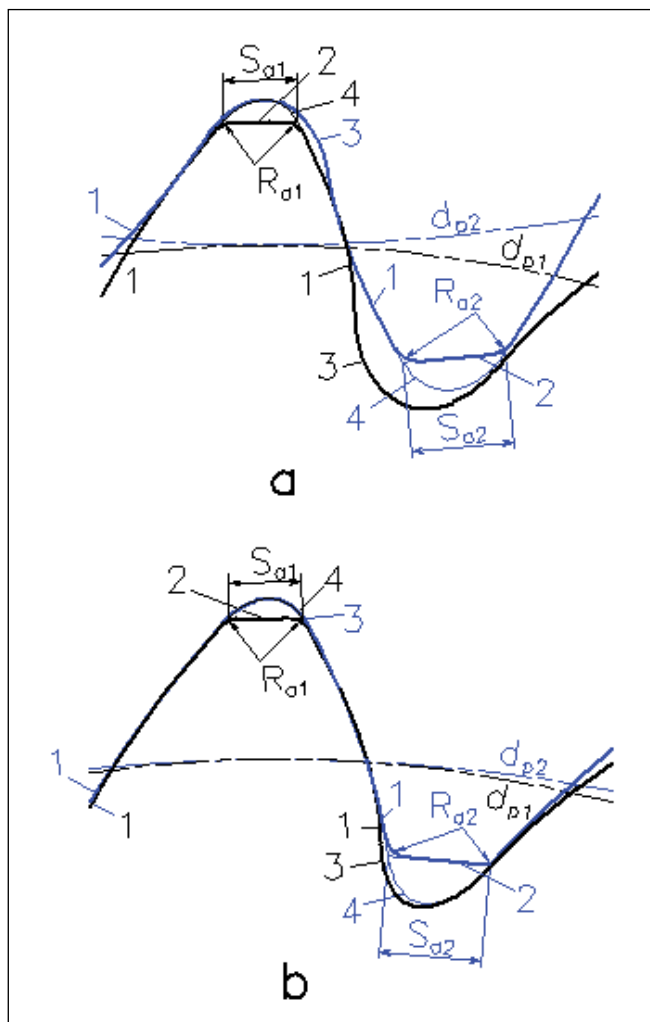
The fillet profile construction. a: external gears; b: internal gearing; 1: involute profiles; 2: tooth tip lands; 3: fillet profiles; 4: ellipsis arcs that are used to generate the fillet profiles.
